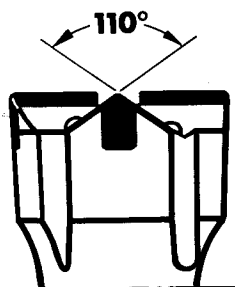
Grind the inserts in turn to a cutting angle of 110°
